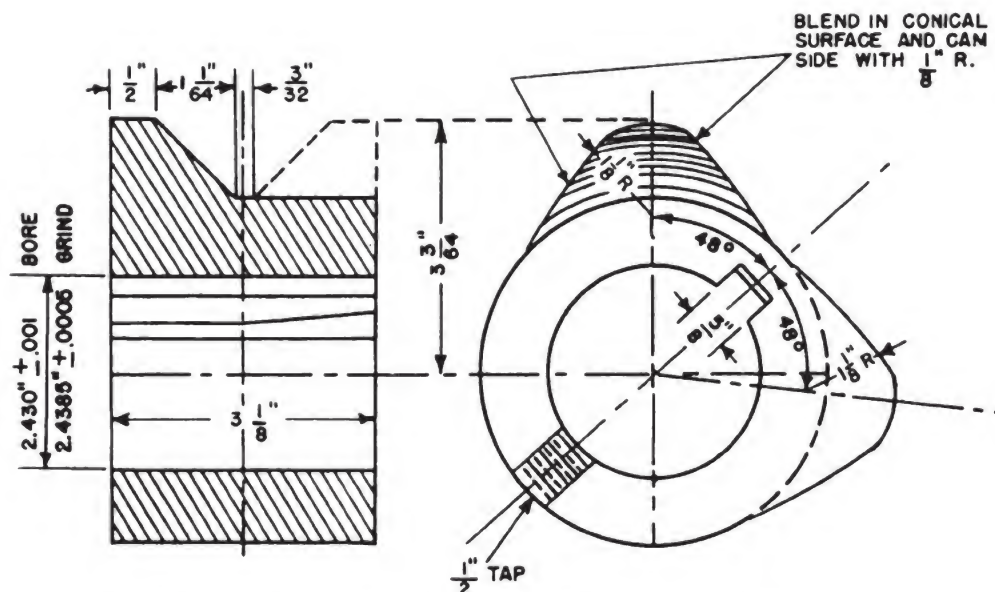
Intake or exhaust cam of a direct-reversible engine.
